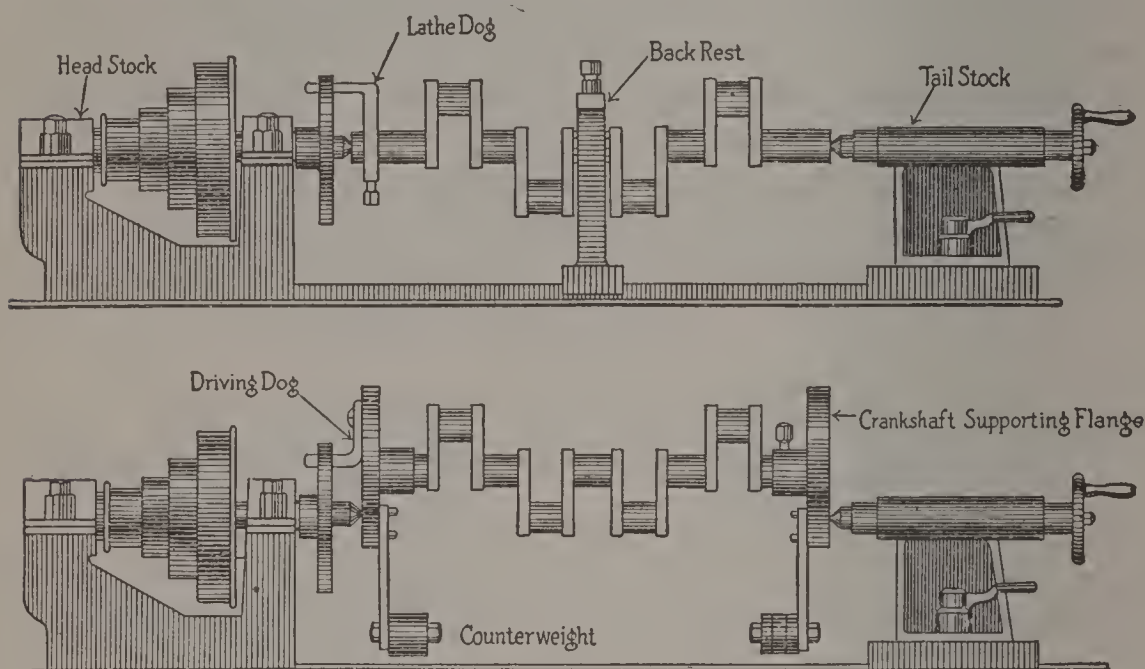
METHODS OF PLACING CRANKSHAFT BETWEEN LATHE CENTERS FOR TRUING MAIN BEARINGS
